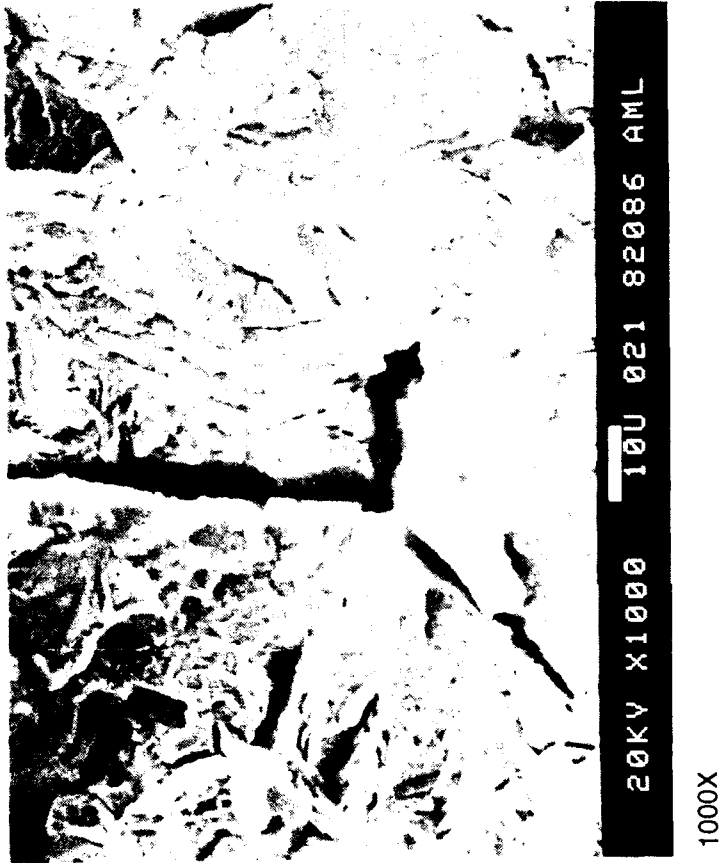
AF1410 Steel-Stress Corrosion Fracture.
